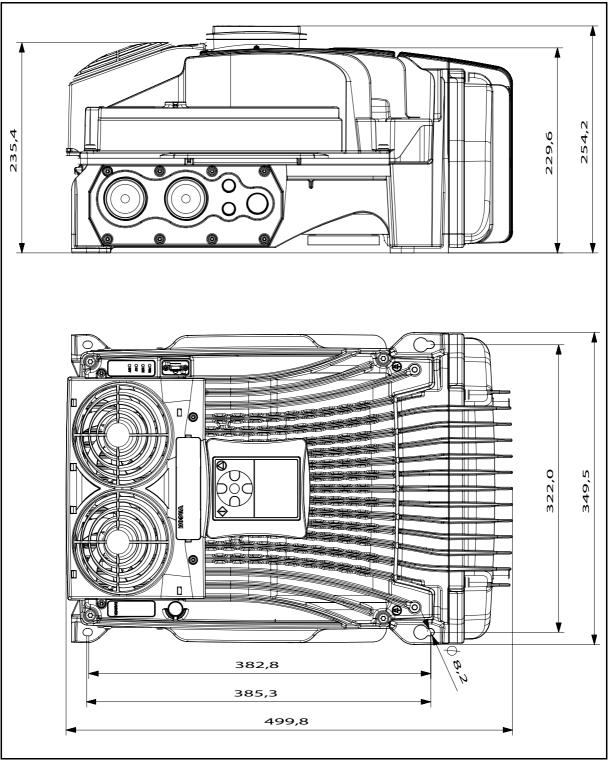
VACON[®] 100 X drive dimensions, MM6.
